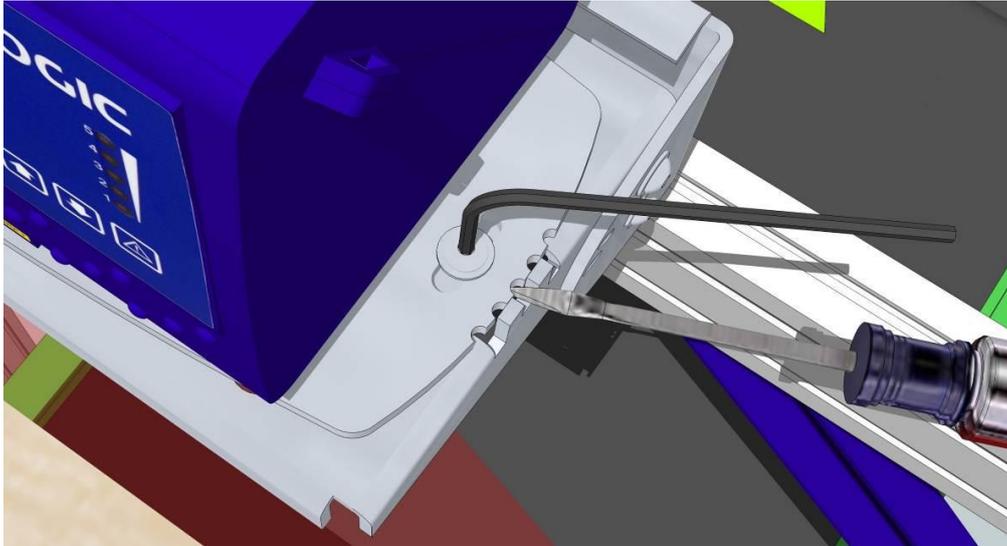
Adjusting UMB Mounting Plate with a Screwdriver
